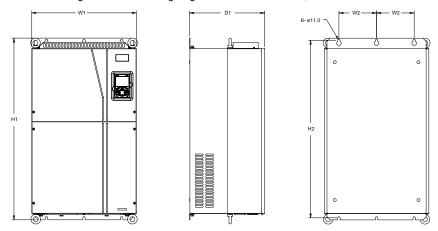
Wall-mounting diagram of inverters of 660 V, 160 to 220 kW
